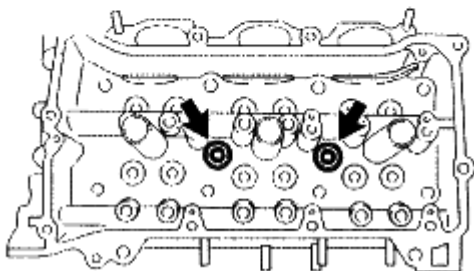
Using Hexagon Wrench To Remove No. 1 Straight Screw Plugs & Gaskets
